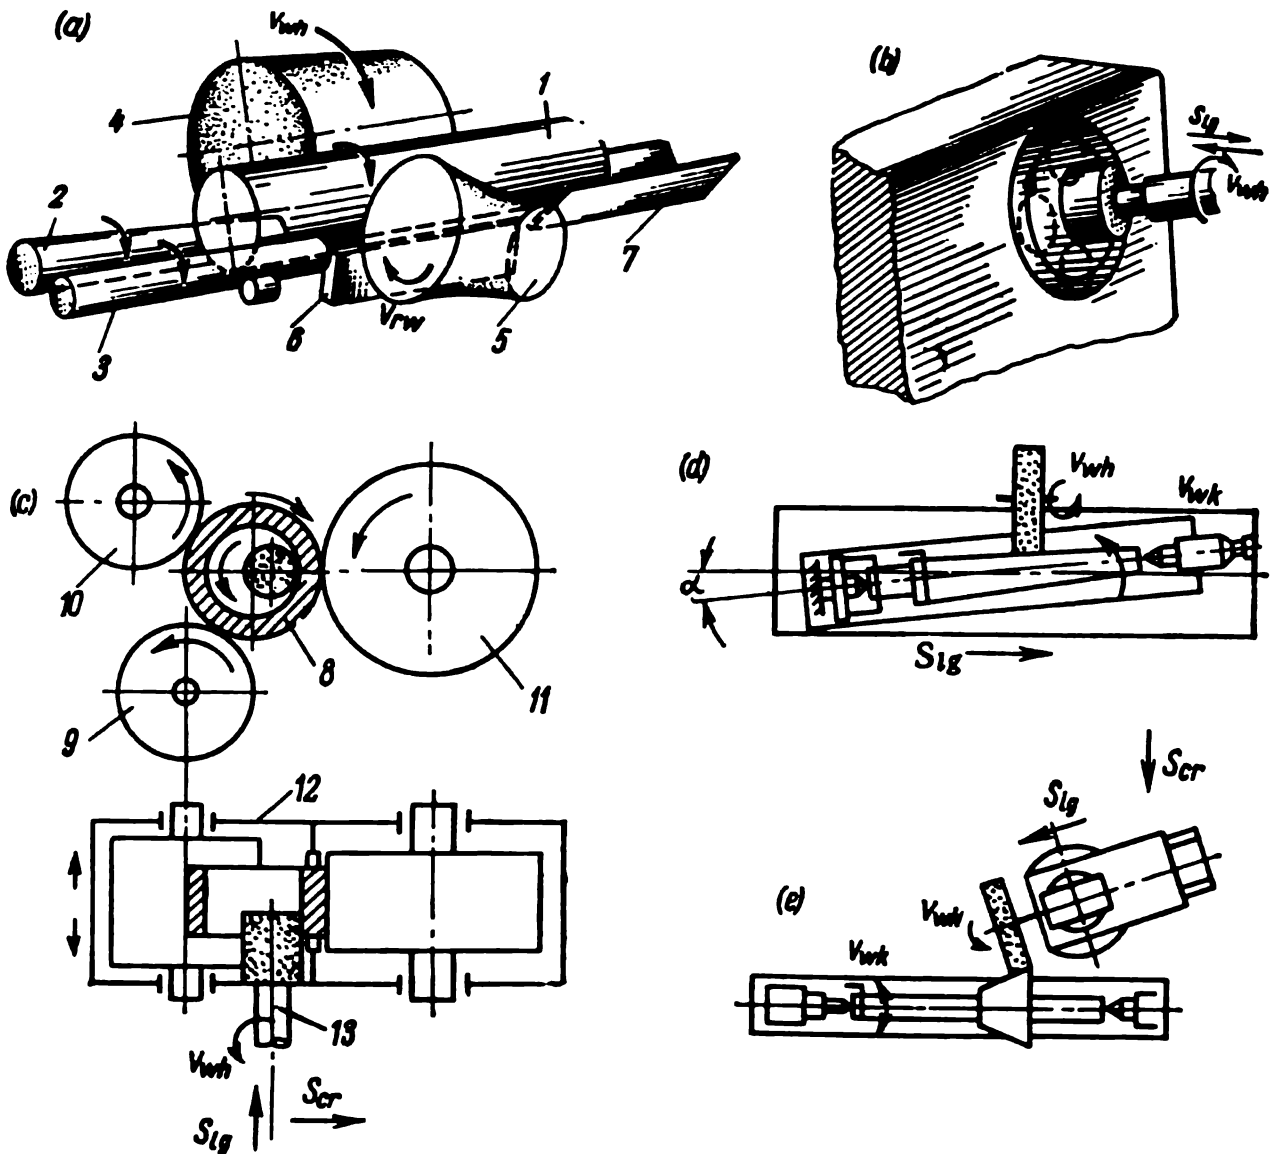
Grinding external and internal cylindrical surfaces and tapered surfaces
